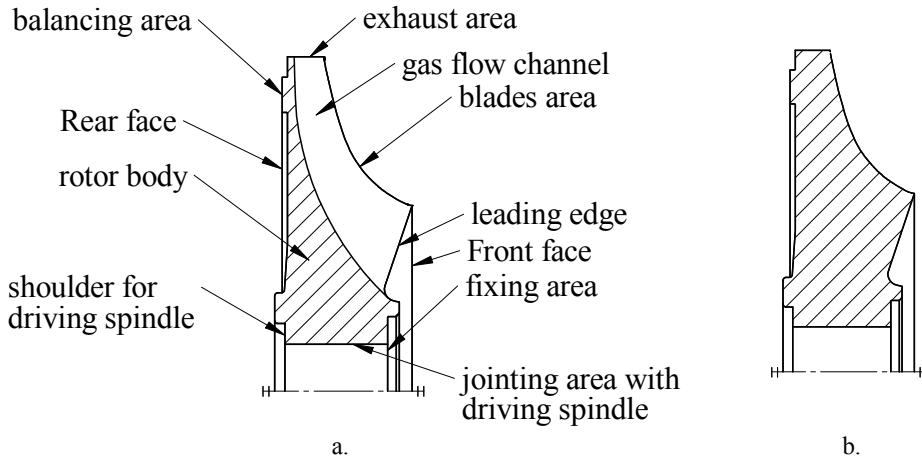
Impeller section: surfaces definition (a); after turning (b).
